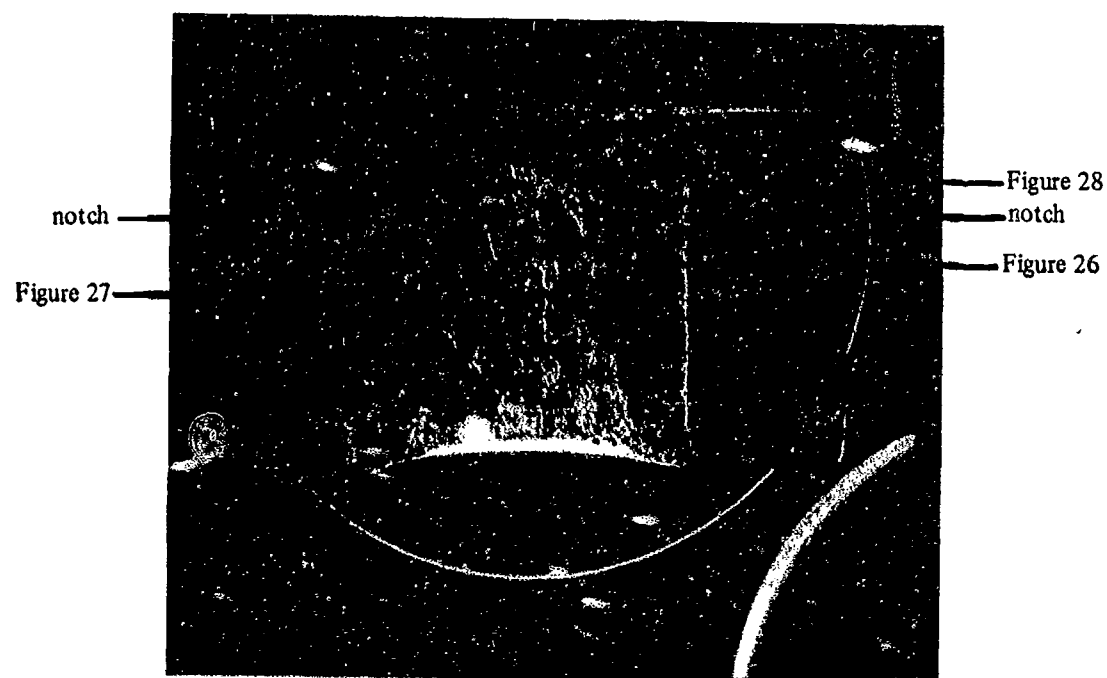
Fracture surface of a hydrogen-embrittled A-36 fatigue specimen, 8x.
